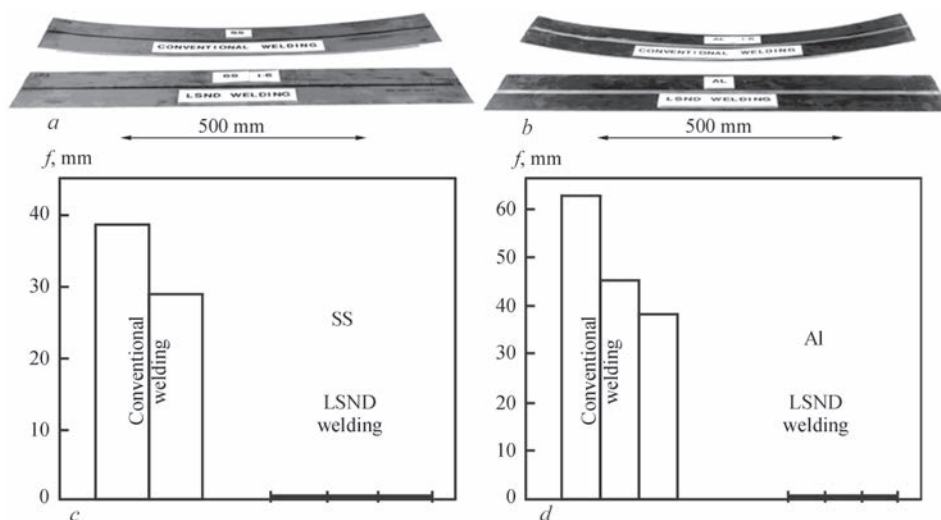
Specimens of 1.6 mm thick, 1000 mm long, of stainless steel (a) and aluminum alloy (b) welded by conventional GTAW, severely buckled (upper), and welded by LSND welding, buckle-free (lower). Completely buckle-free results ($f=0$) can be achieved using optimized LSND welding technique on both stainless steel (c) and aluminum alloy (d) specimens of 1.6 mm thick
